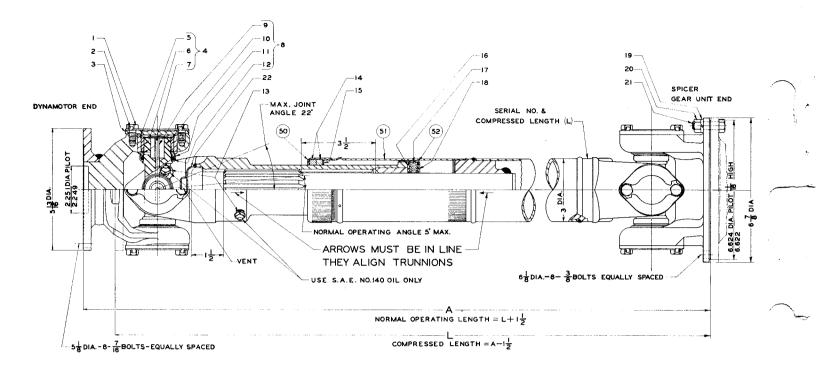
9439-SF PROPELLER SHAFT (Special—Pullman Dynamotor)
